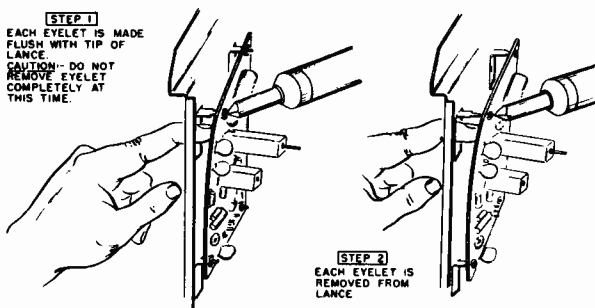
Removal of Printed Circuit Board from Receiver Chassis
